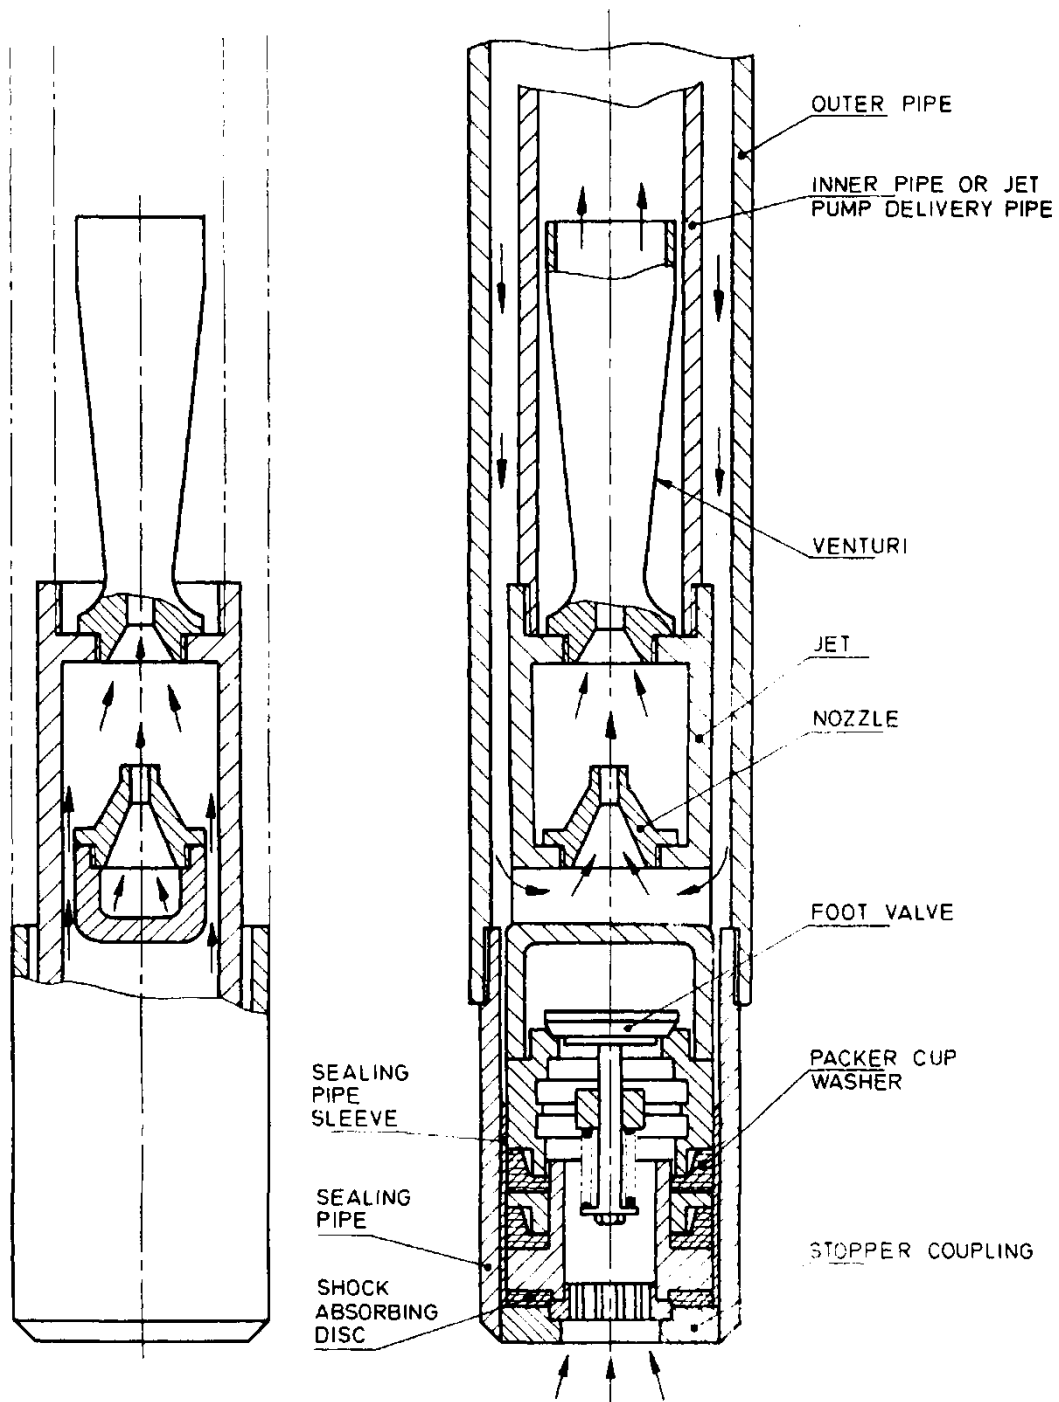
SECTION THROUGH A PACKER TYPE JET PUMP ASSEMBLY
